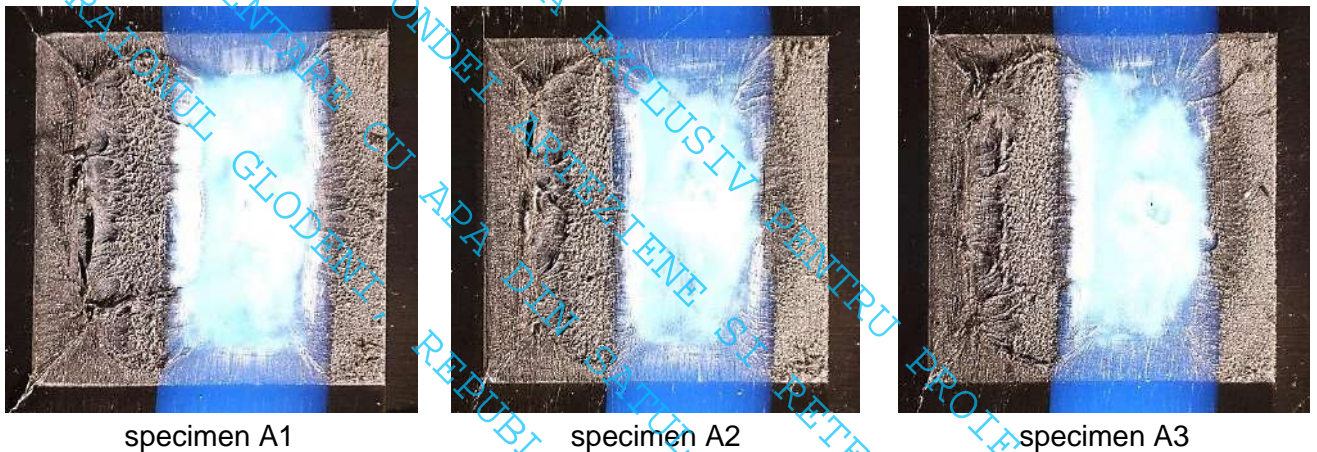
Top view of the fracture surfaces (one half of each specimen)
